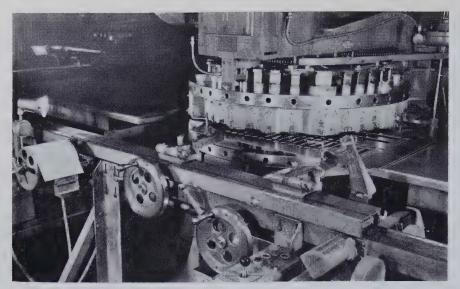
The motor-operated turret press, used to punch component mounting holes in the steel panels, is viewed from the press operator's station.
